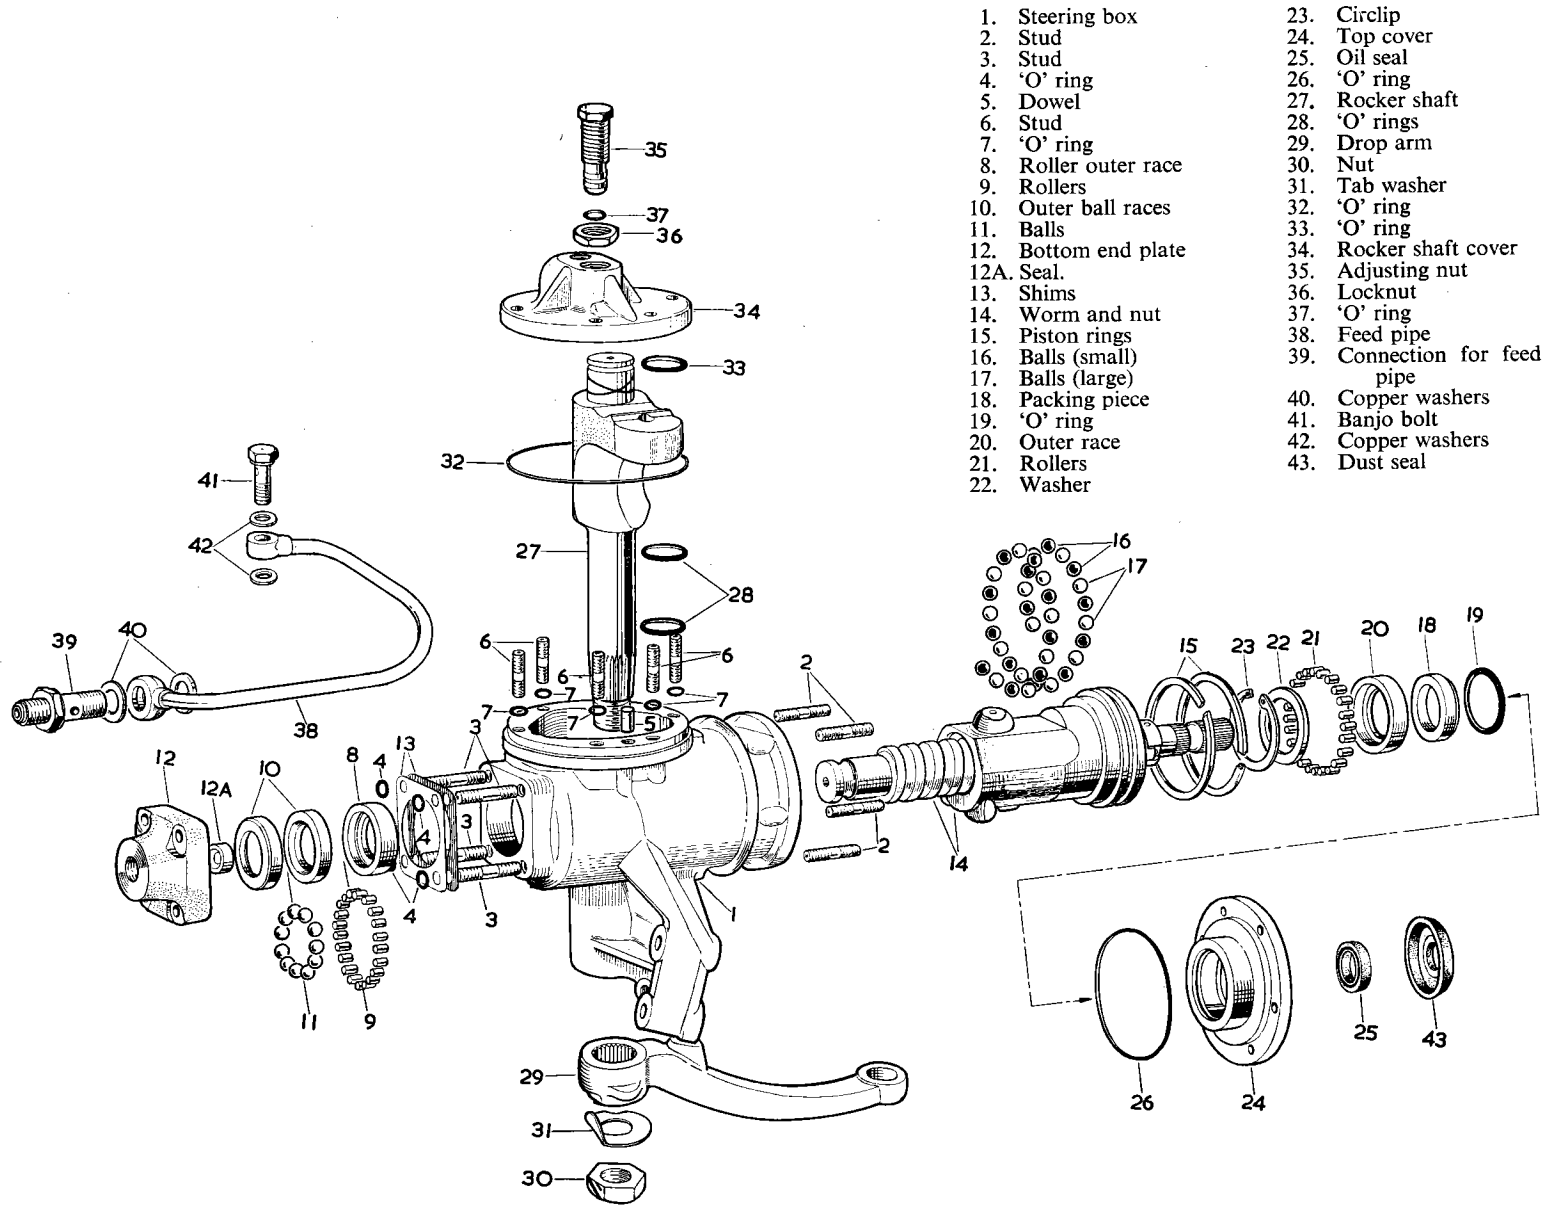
Exploded view of the steering unit (right-hand drive illustrated)
